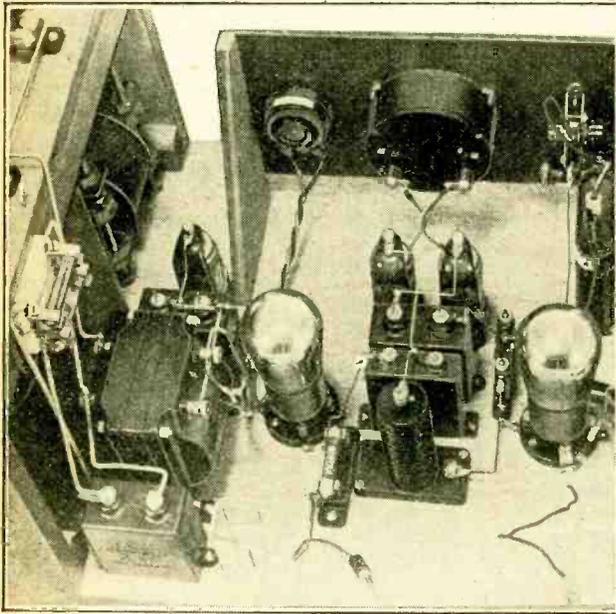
The arrangement of the components provides for easy wiring. This view shows the layout of the apparatus associated with the detector and first L.F. amplifier.
